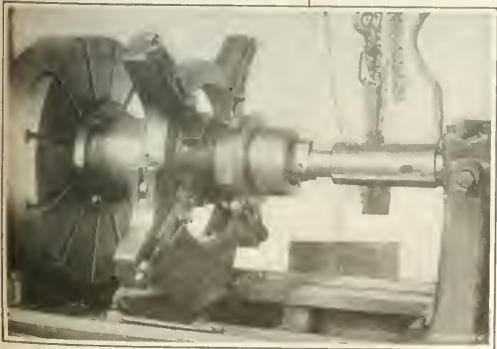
Rough- and finish-boring Internal Diameter on a 36-inch Engine Lathe
